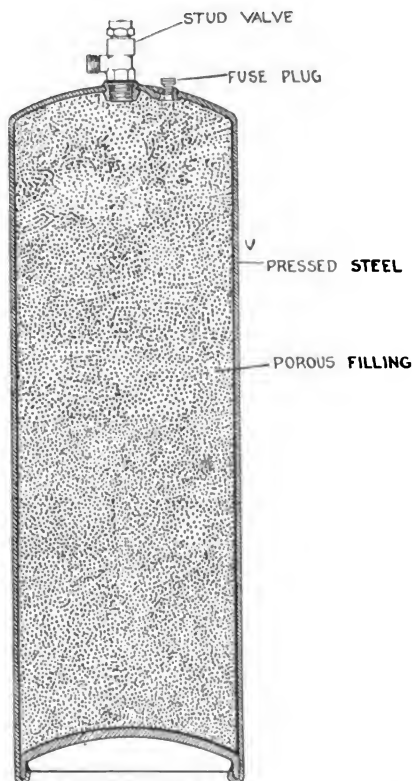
ACETYLENE GAS IS STORED IN SAFETY TANKS
